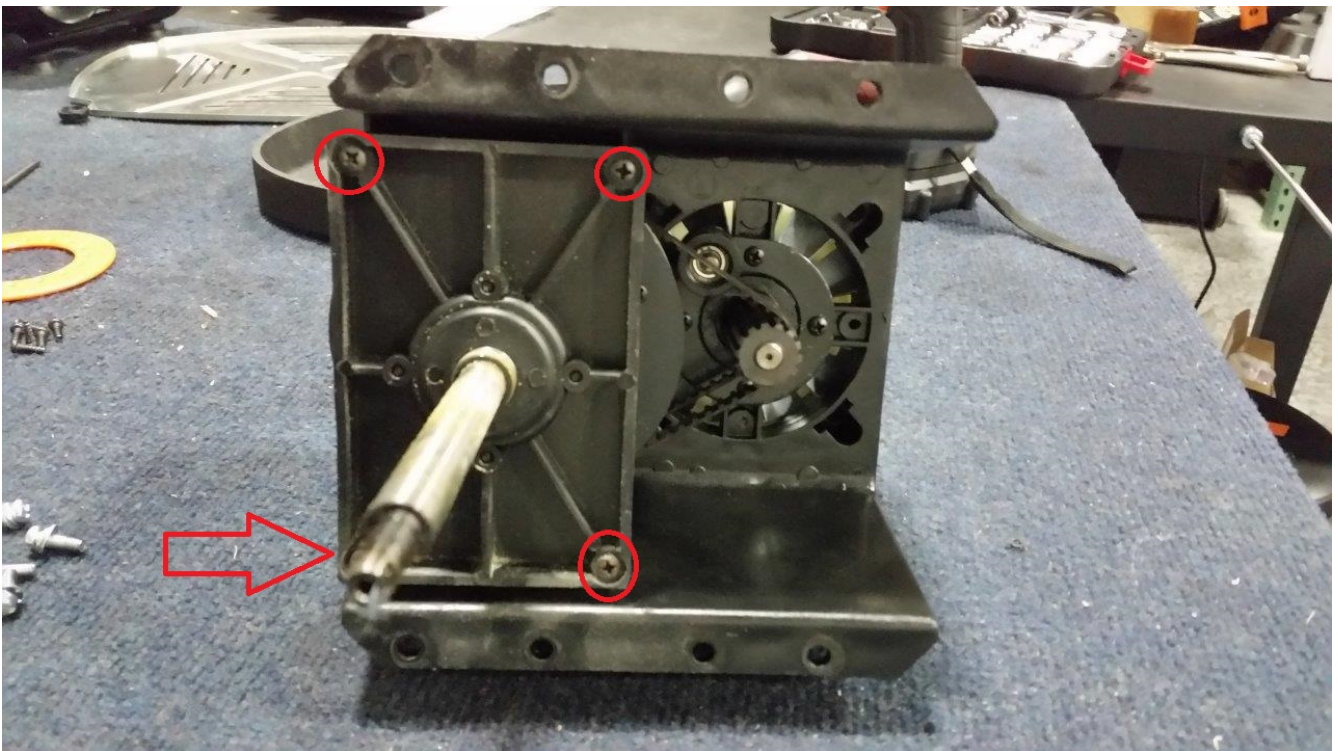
There are four (4) more screws on the other side; remove those too.
